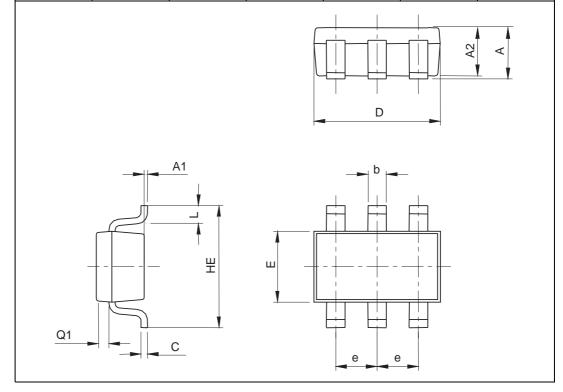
SC70-6 (or SOT323-6) package footprint (in millimeters)
